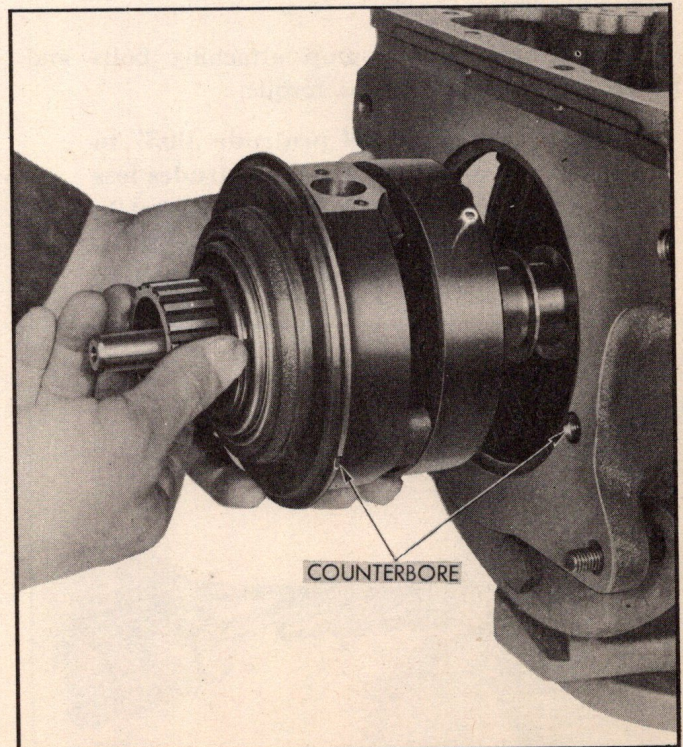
Installing Front Pump and Front Drive Gear Assembly and Bronze Thrust Washer over Planet Carrier
